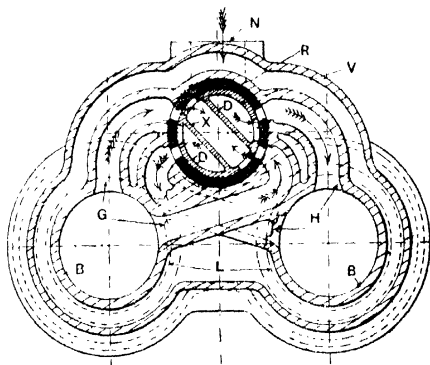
A.—Cross-section showing balanced-action rotary admission-exhaust valve applied to a double cylinder horizontal, 5 in. × 6 in., car motor.
